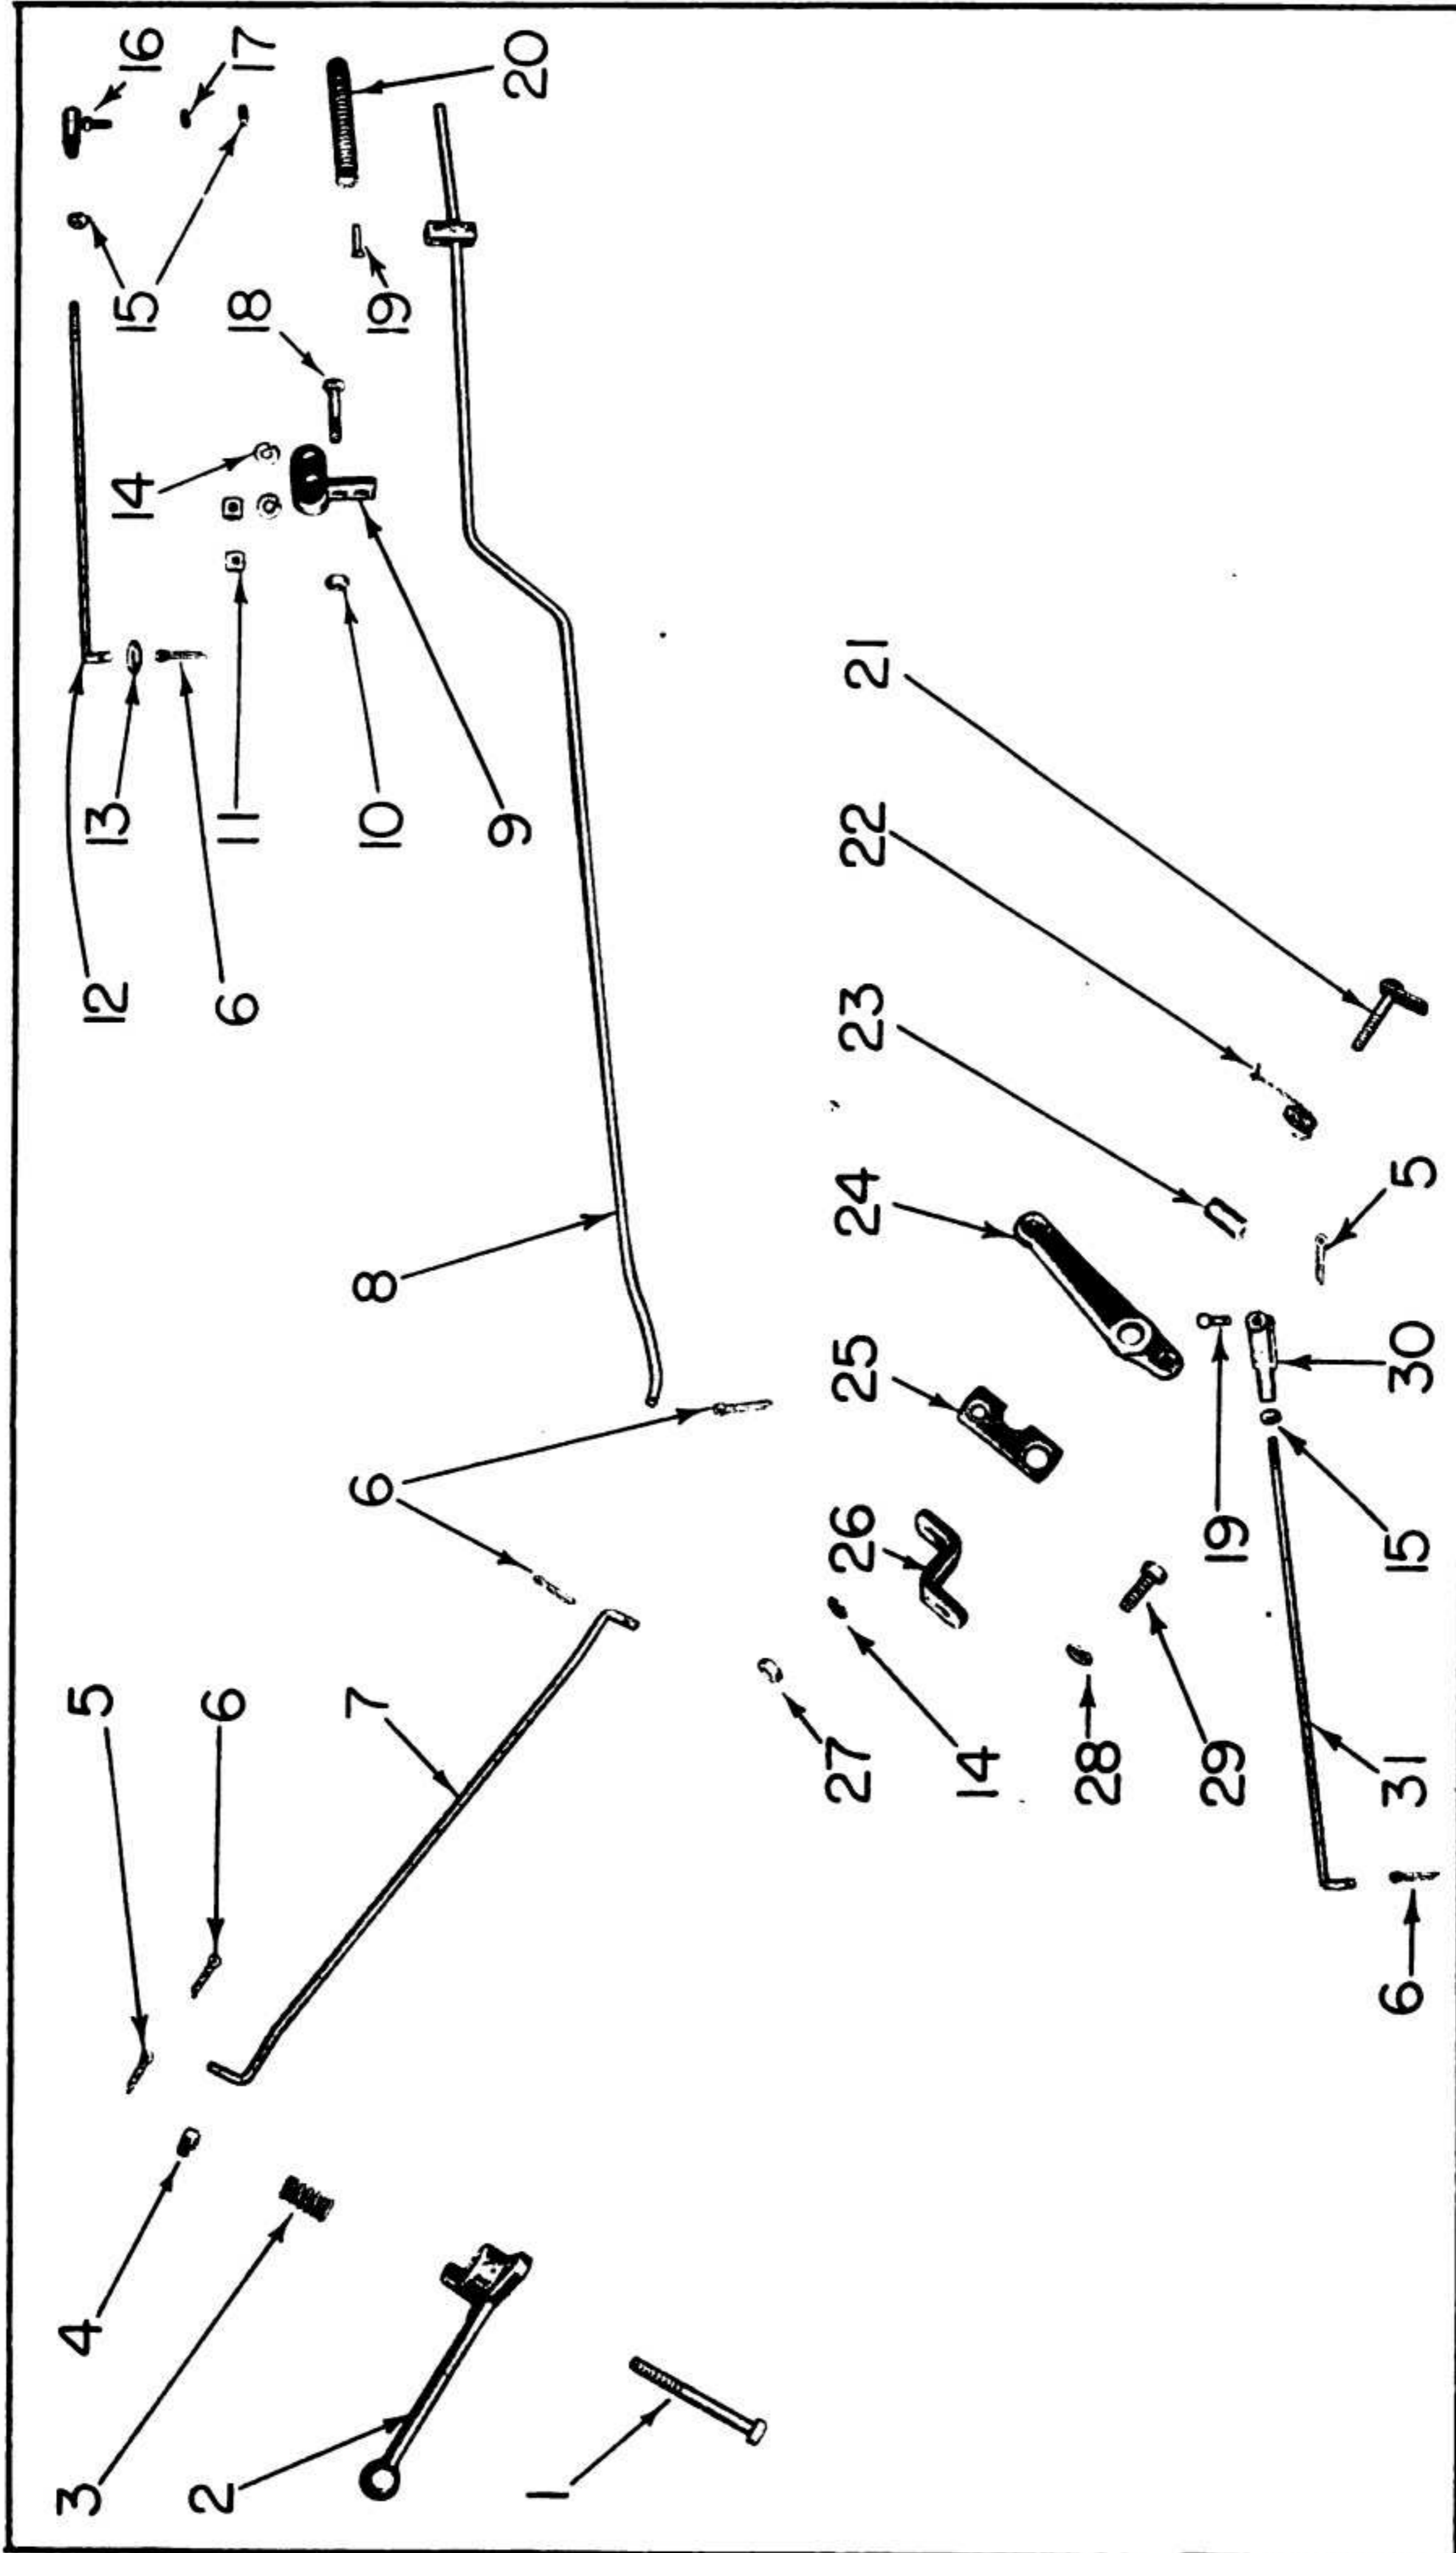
0302 GOVERNOR CONTROL PARTS
